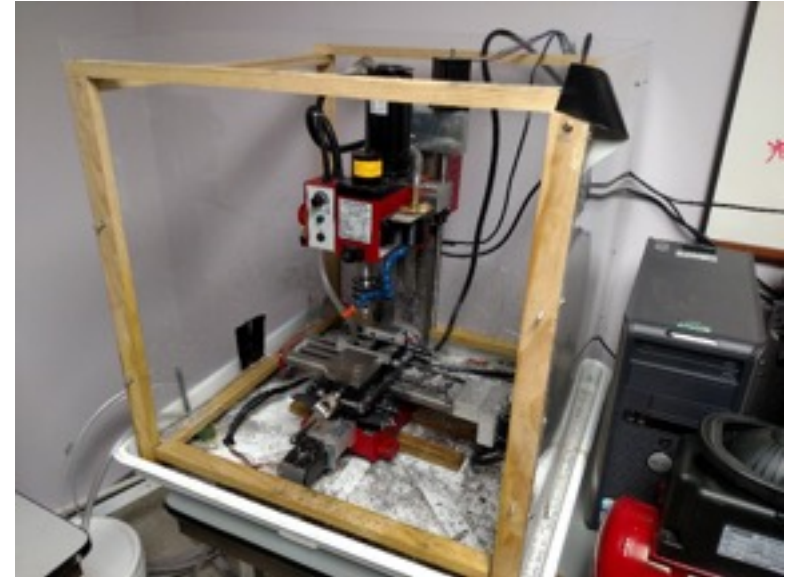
Custom CNC Drill for Aluminum Frame Milling
